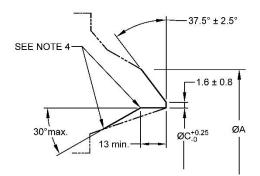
WELDING AND TRANSITIONS MAXIMUM ENVELOPE
